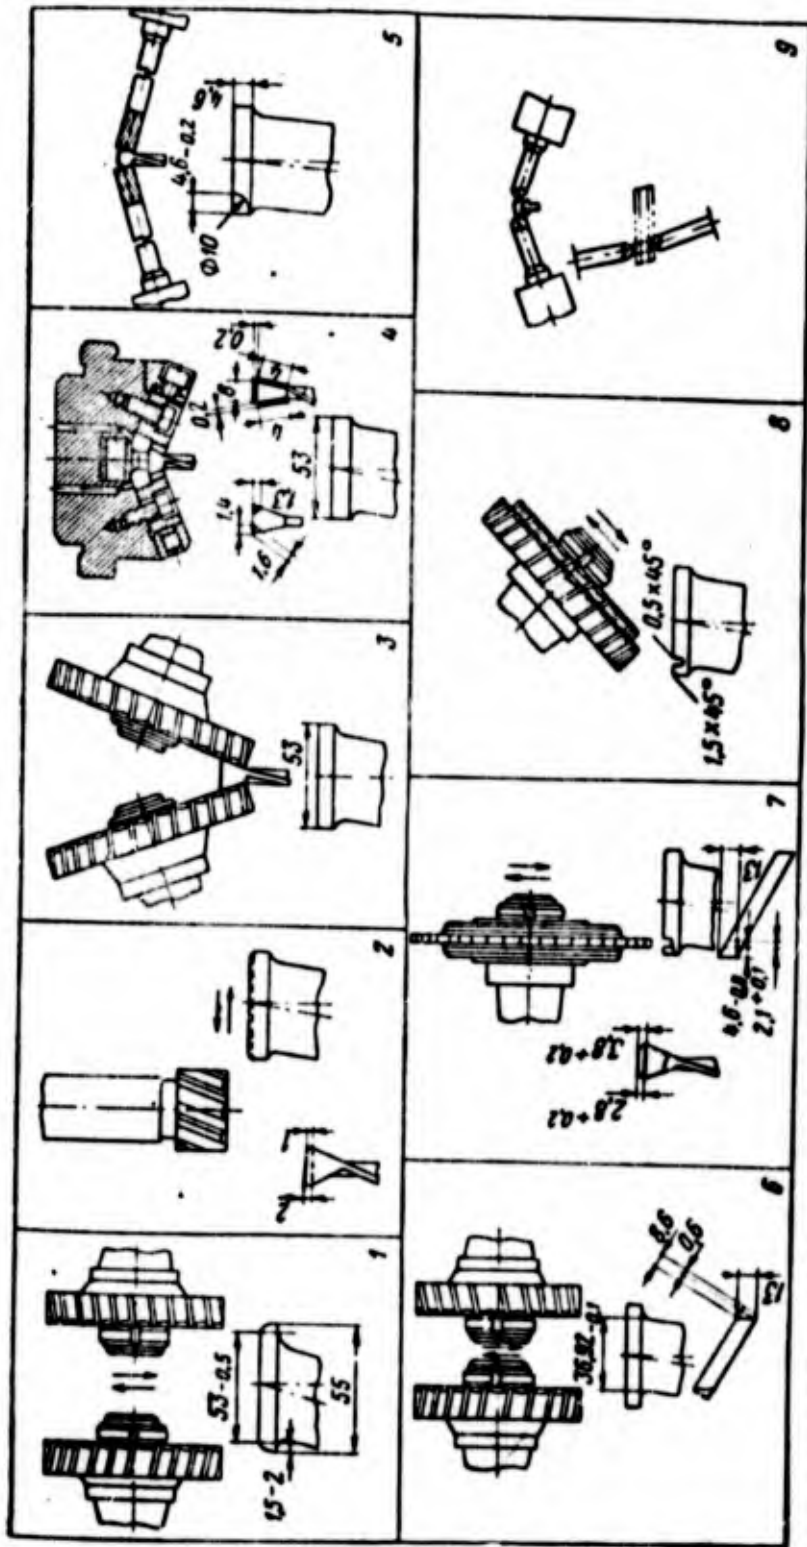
Chart of working of root of compressor rotor blade on transfer machine AL-1.
